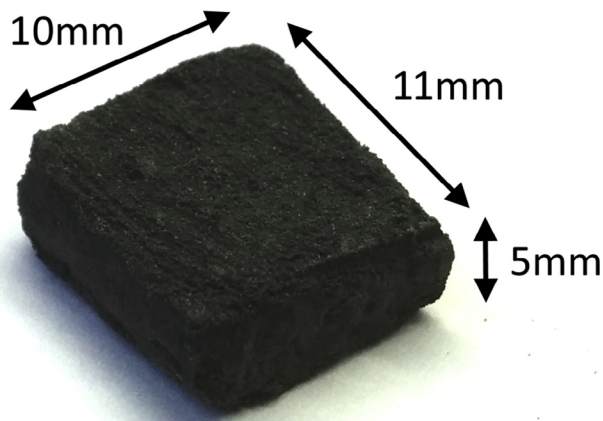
Dimensions of BJ-AM MMC part after sintering.
